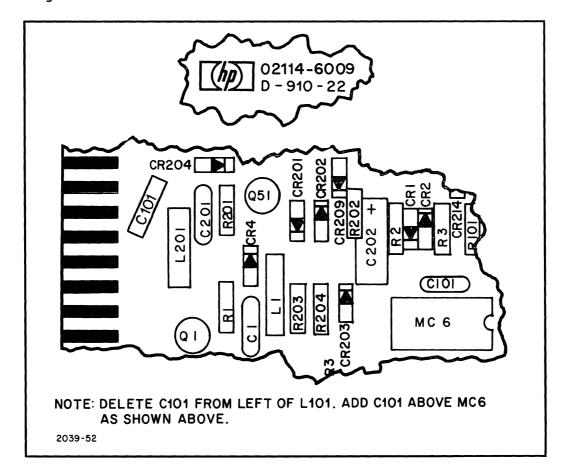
Display Board (02114-6009), Partial Parts Location Diagram Showing Changes for Board Revision D-910-22
